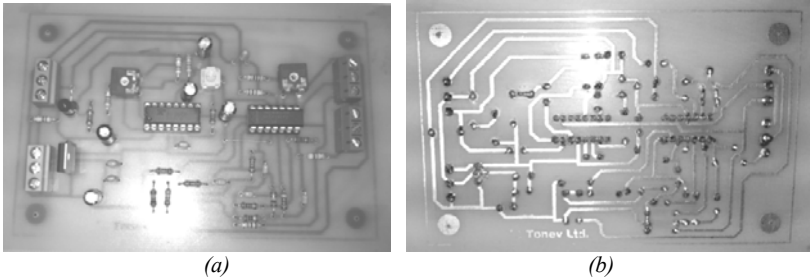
Implementation of electrical plate of LF part: view from above (a), view below (b)
